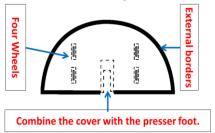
shows the cover surface design. Cover Body is designed to prevent the operator from approaching the Straight knife fabric cutting machine housing. Care must be taken to ensure it is made of a transparent and highly light-transmitting material that is resistant to dust and is scratch-resistant. Care must be taken to ensure that the cover components are made of a transparent, highly
